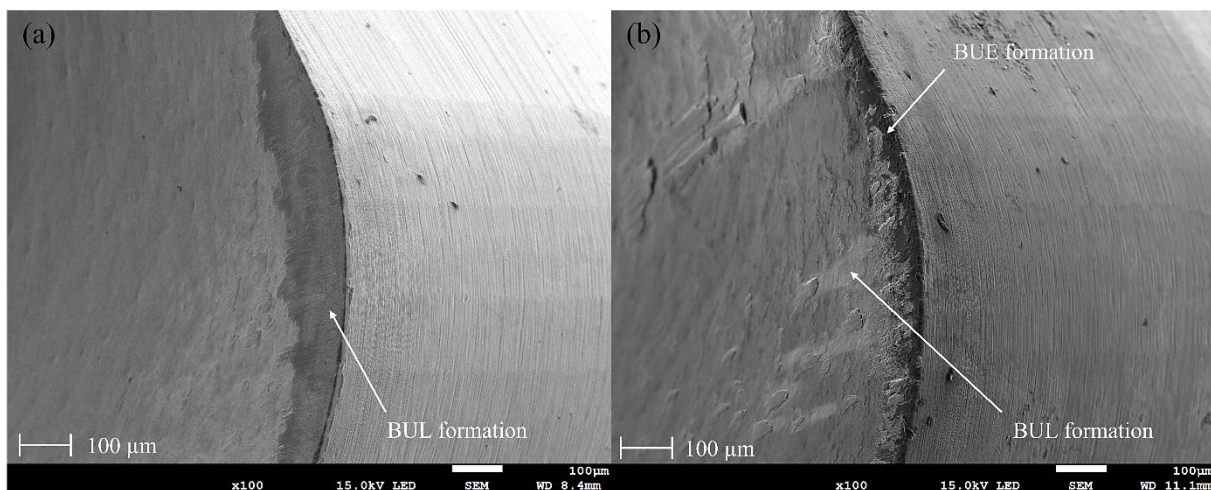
Cutting edge comparison of uniform WC-Co cemented carbide tools after machining two grade types of aluminum workpiece materials. (a) Machining of 6082-grade aluminum. (b) Machining of Alumec 89 grade aluminum.
